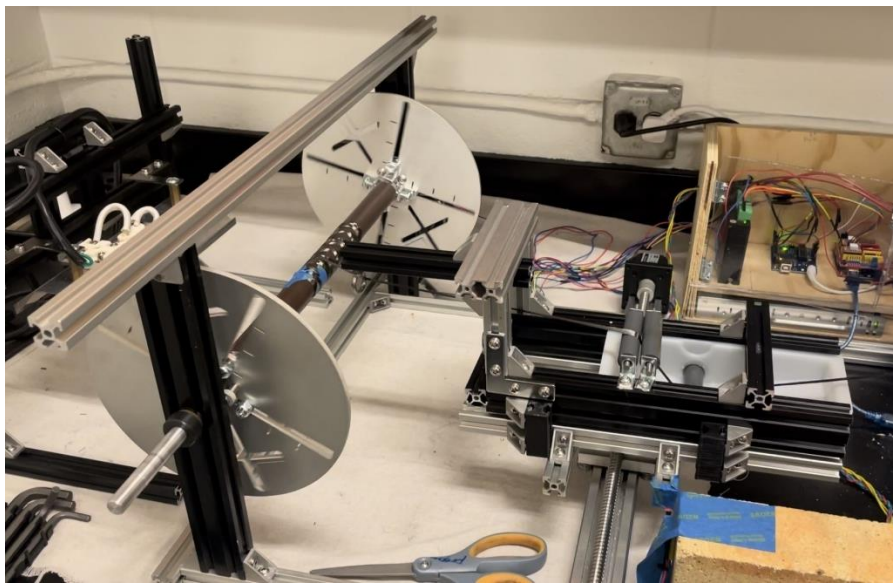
Filament winding machine with the original chuck mounting system on the left and the original, multiple Arduino communication on the right side of the image.
